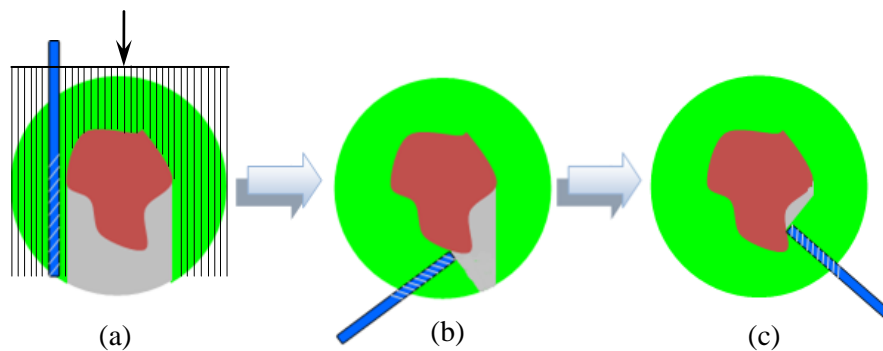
Roughing operation approach in CNC machining (Frank 2007)
